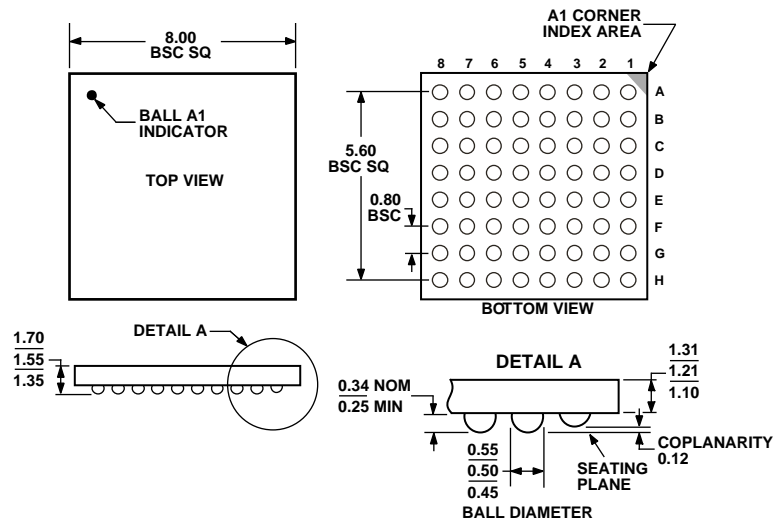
64-Lead Chip Scale Package Ball Grid Array [CSP_BGA] (BC-64-1)
